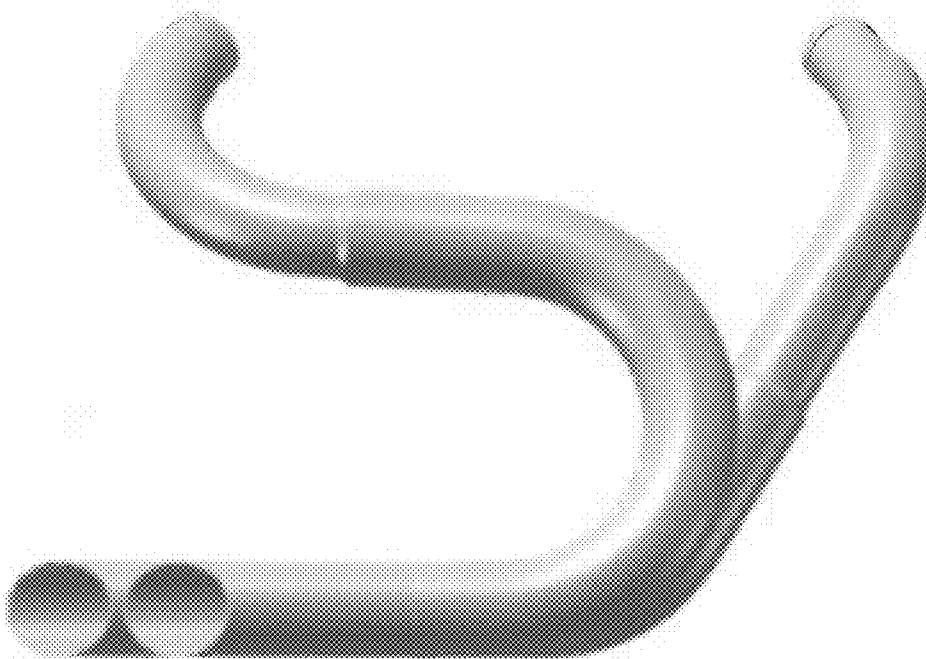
is a bottom view of the design for a motorcycle exhaust pipe shown in FIGS. 1-3.
